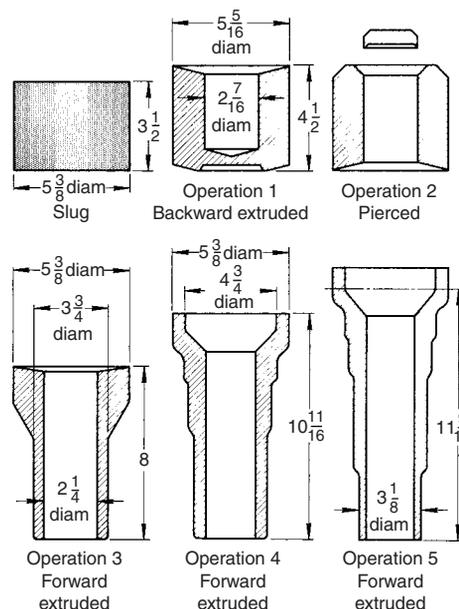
1030 steel (hardness: 75–80 HRB) axle-housing spindle produced by extruding and piercing in five operations. Dimensions given in inches
